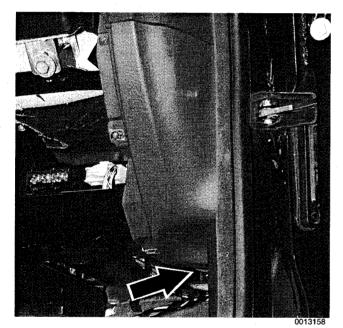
Lower right dash trim piece retaining screw (arrow).
